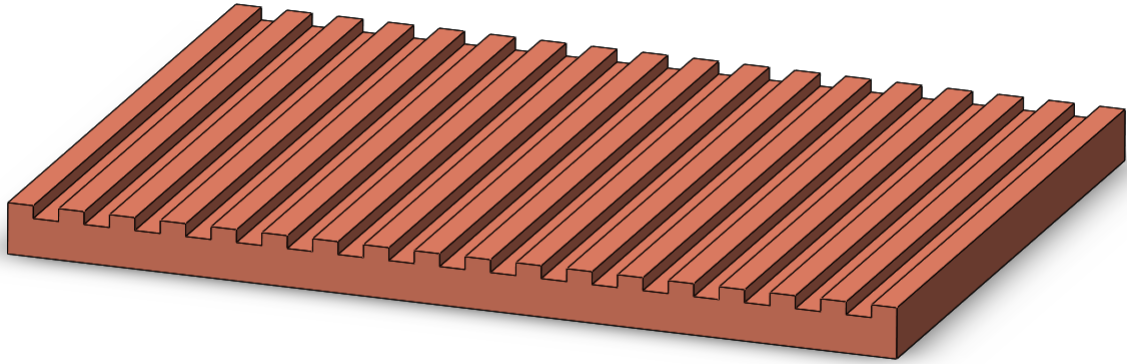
Cross sectional view of the minichannel heat sink with a hydraulic diameter of 0.8mm
